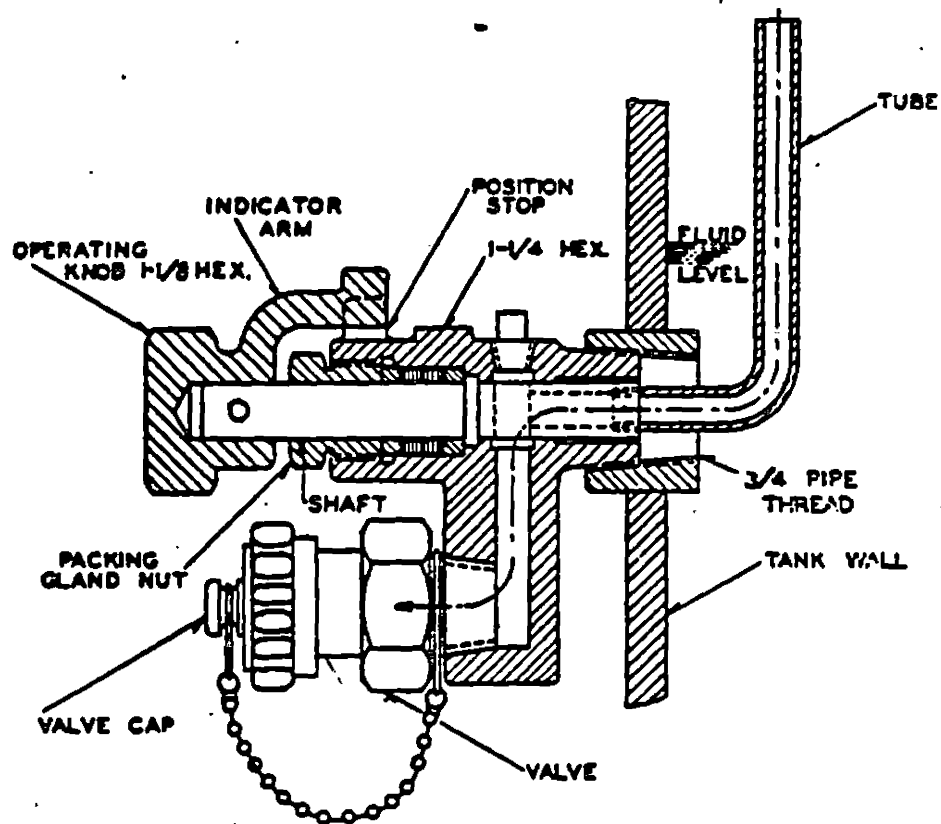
Westinghouse Rotary Type Sampling Valve
